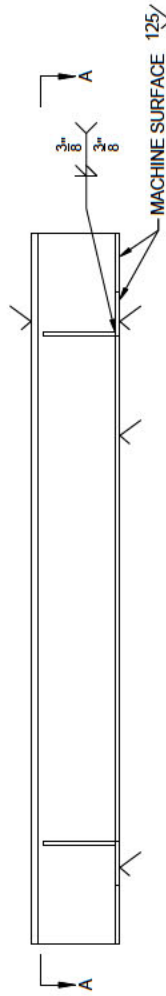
30-degree mounting fixture for testing back mounted equipment on the MWSM. (Sheet 3 of 5)
